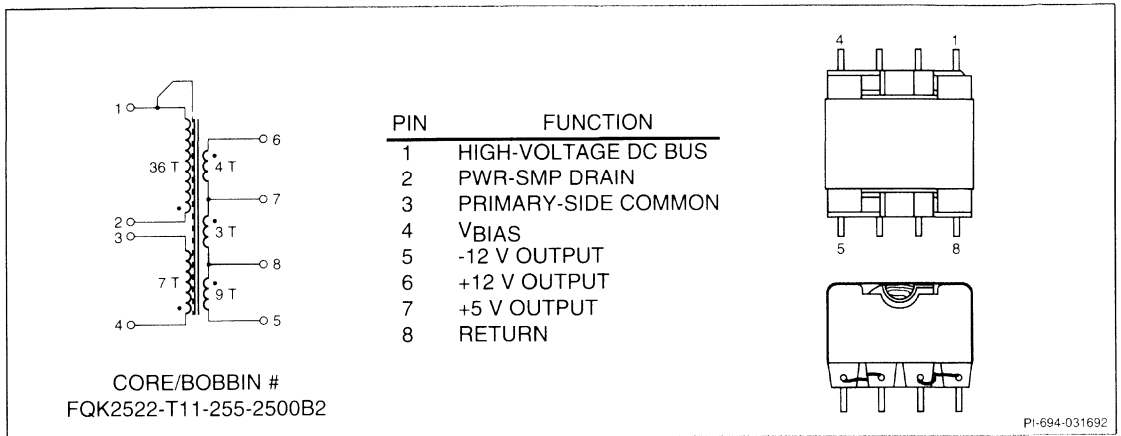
T1005 Transformer Pinout and Physical Dimensions¹.
